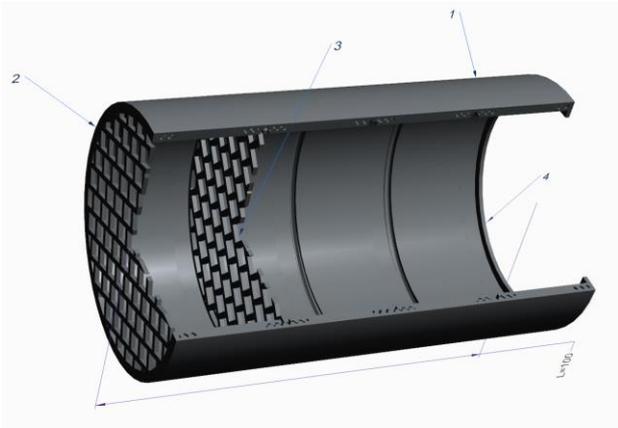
Test cartridge (Capsule1) – CNC machining. Explanatory note: 1–cartridge housing; 2–lower perforated bottom (sieve); 3–top perforated lid (sieve); L–modifiable length.
